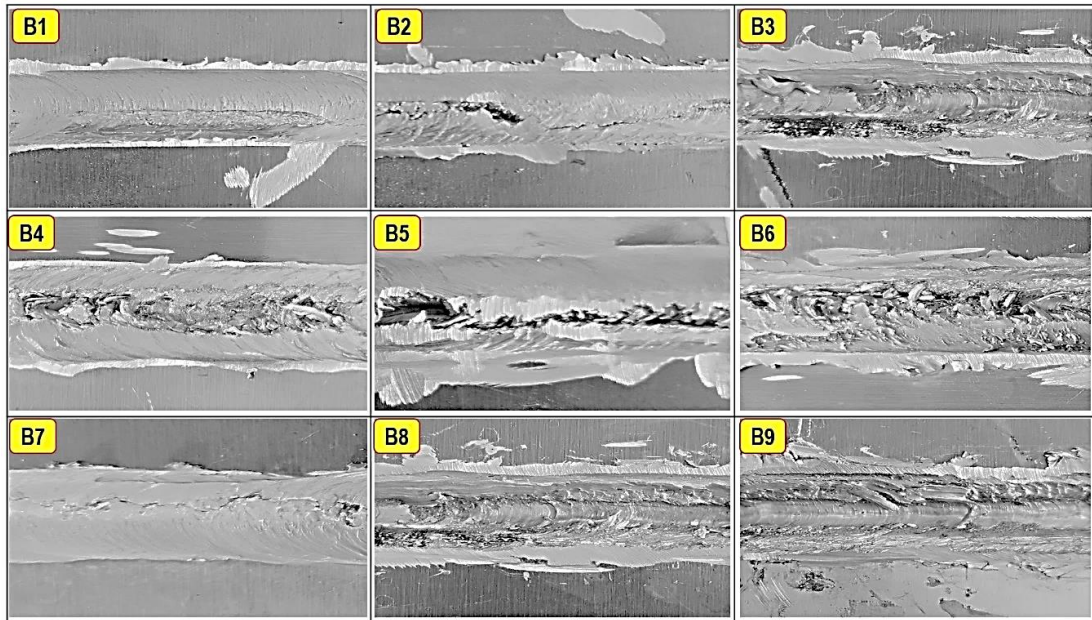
Weld top surface of UVaFSWed AA7075-T651 joints
